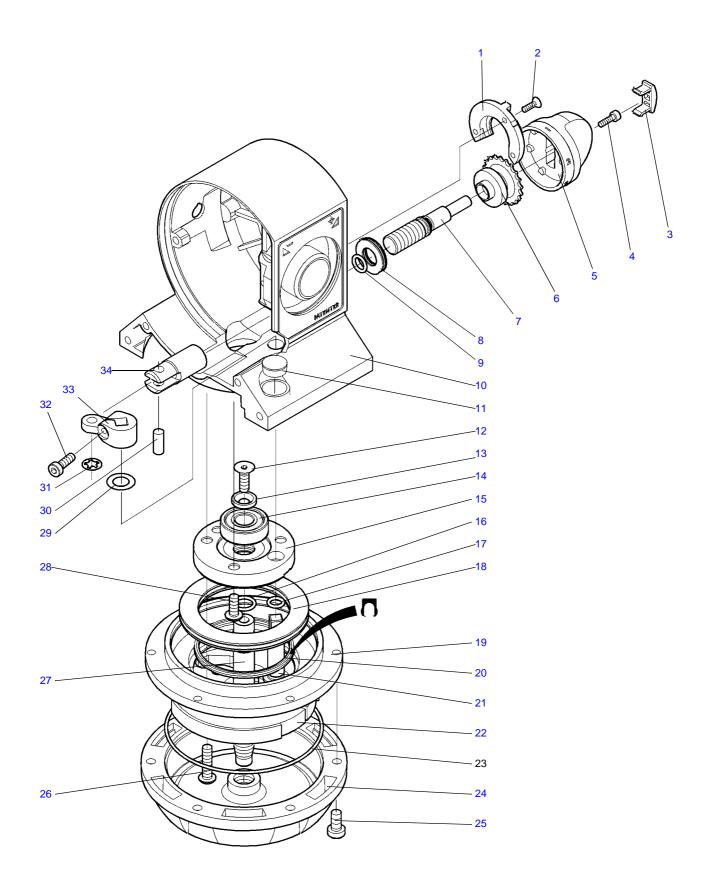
Vision 5LF Pan and Tilt Head - Pan Mechanism
